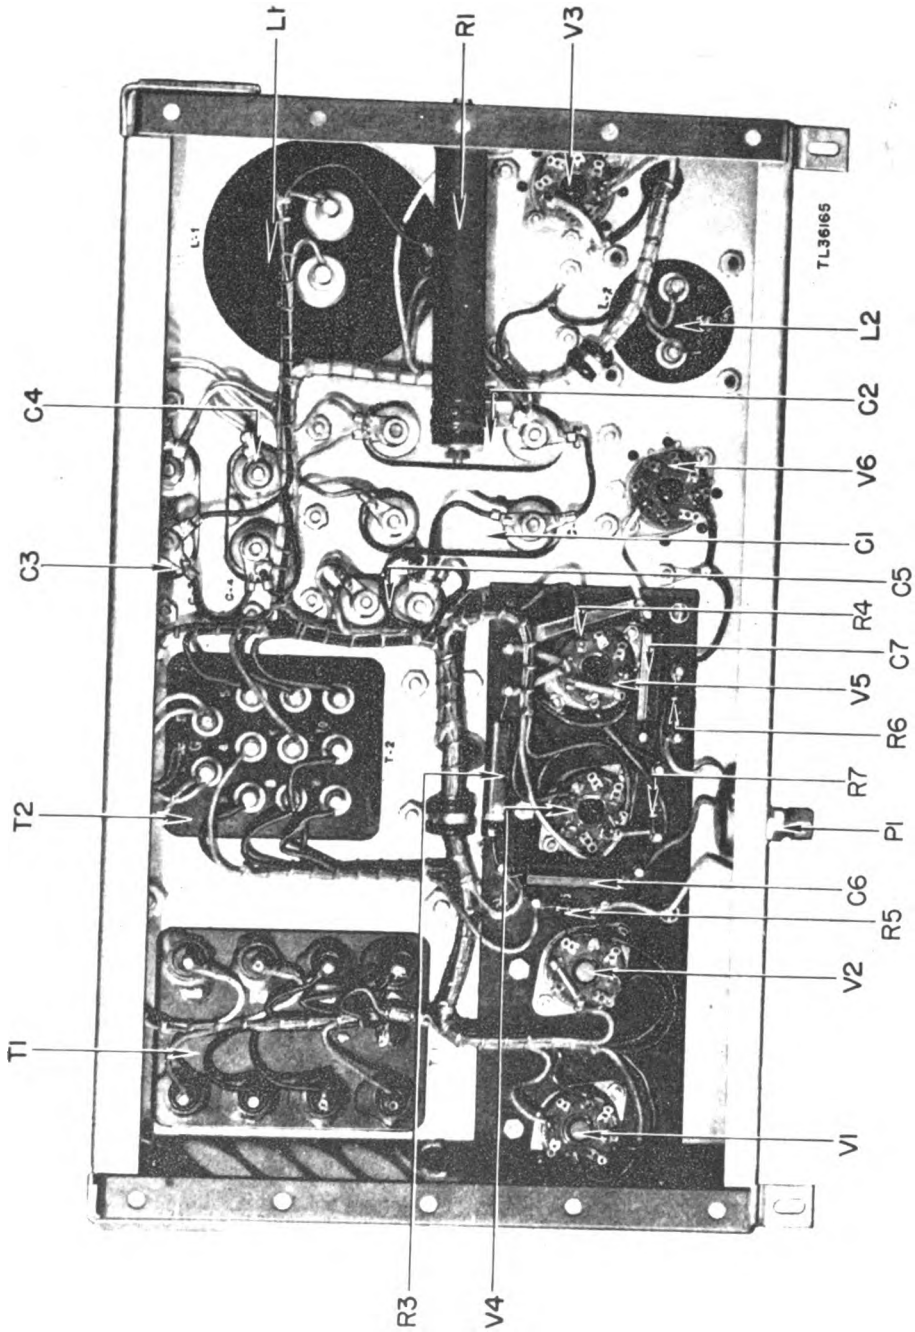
Rectifier Power Unit PP-27/MPN-1, bottom view.
